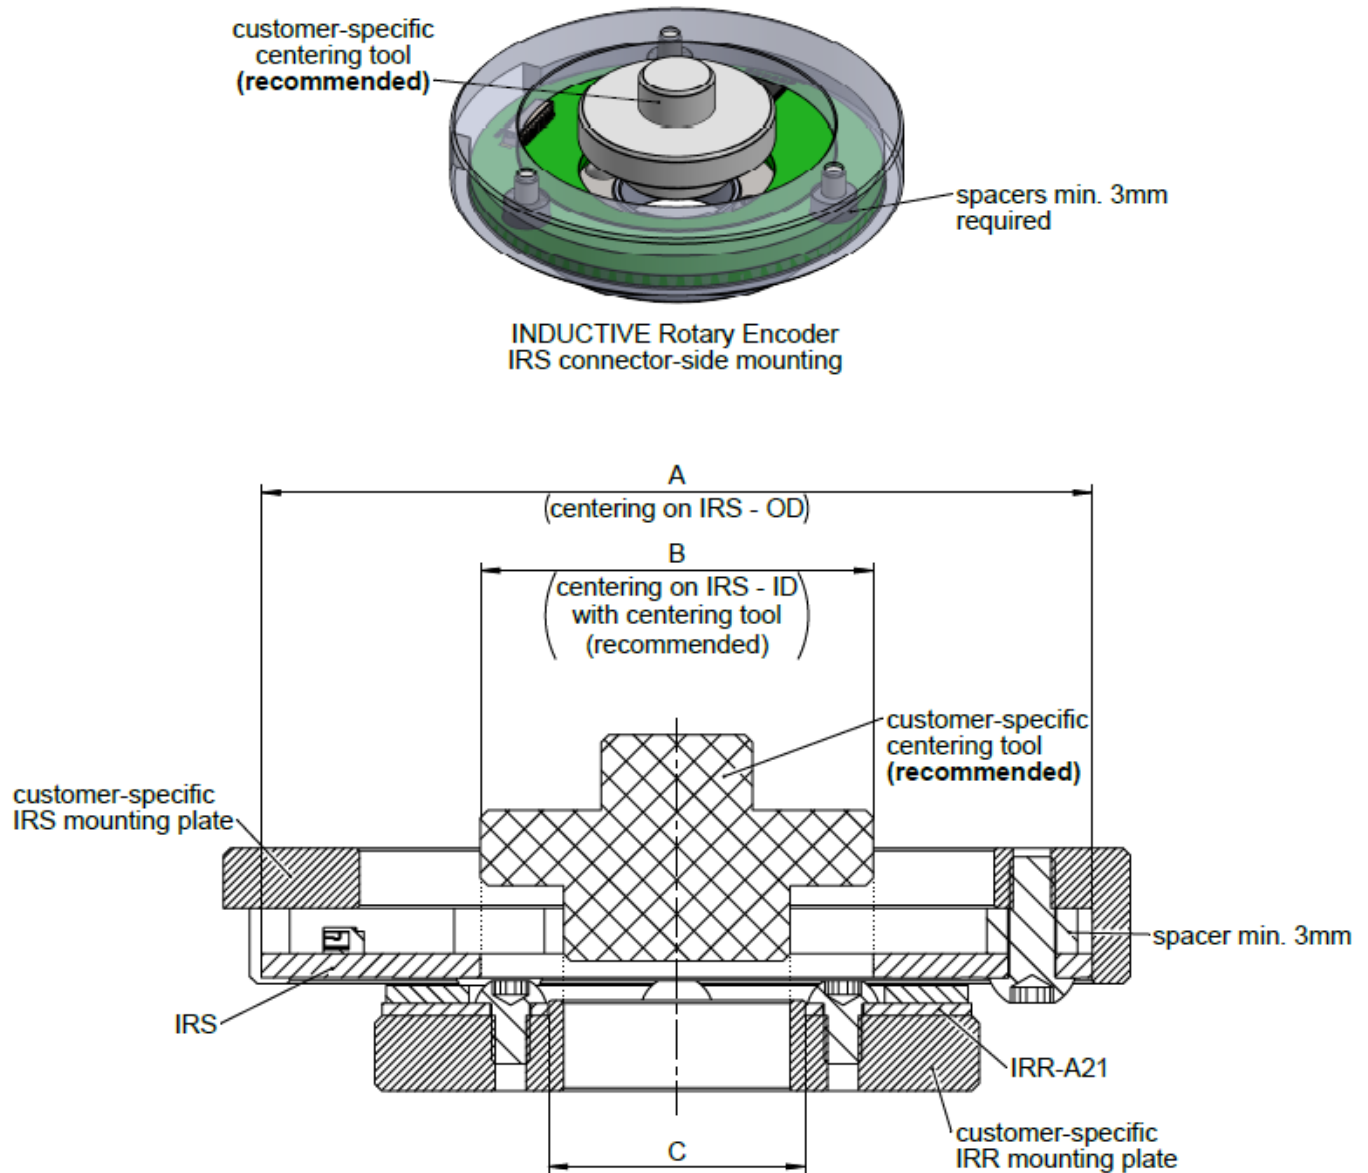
INDUCTIVE Rotary Encoder: IRS connector-side mounting and centering.
